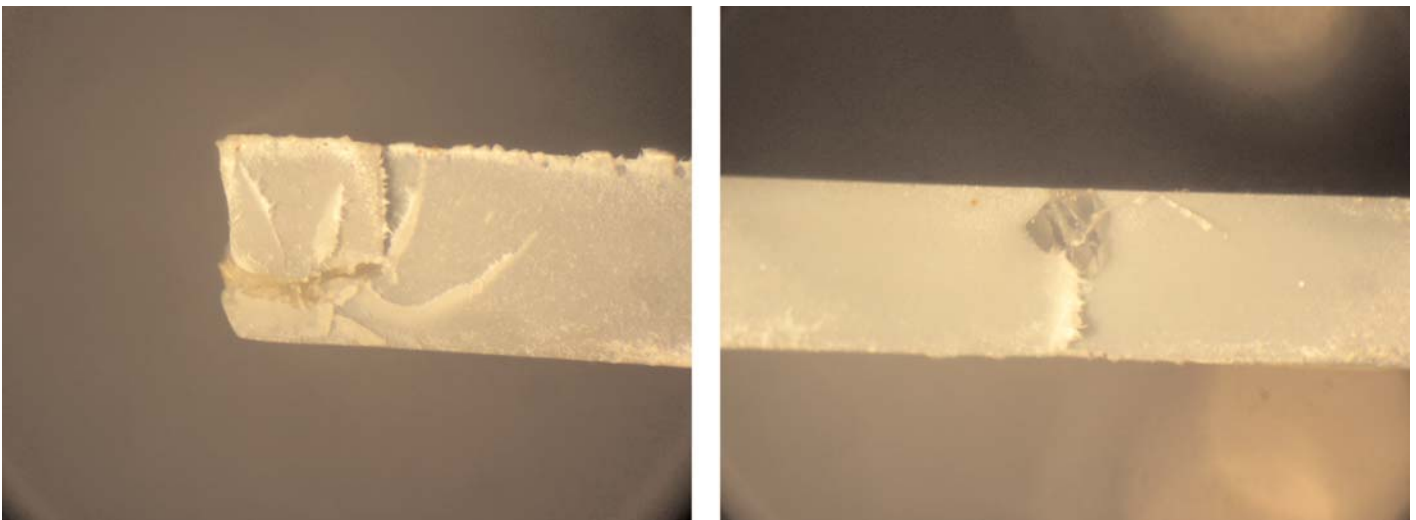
BAM test fracture surfaces for failure times of 11 h (left) and 133 h (right) (unfiltered).
